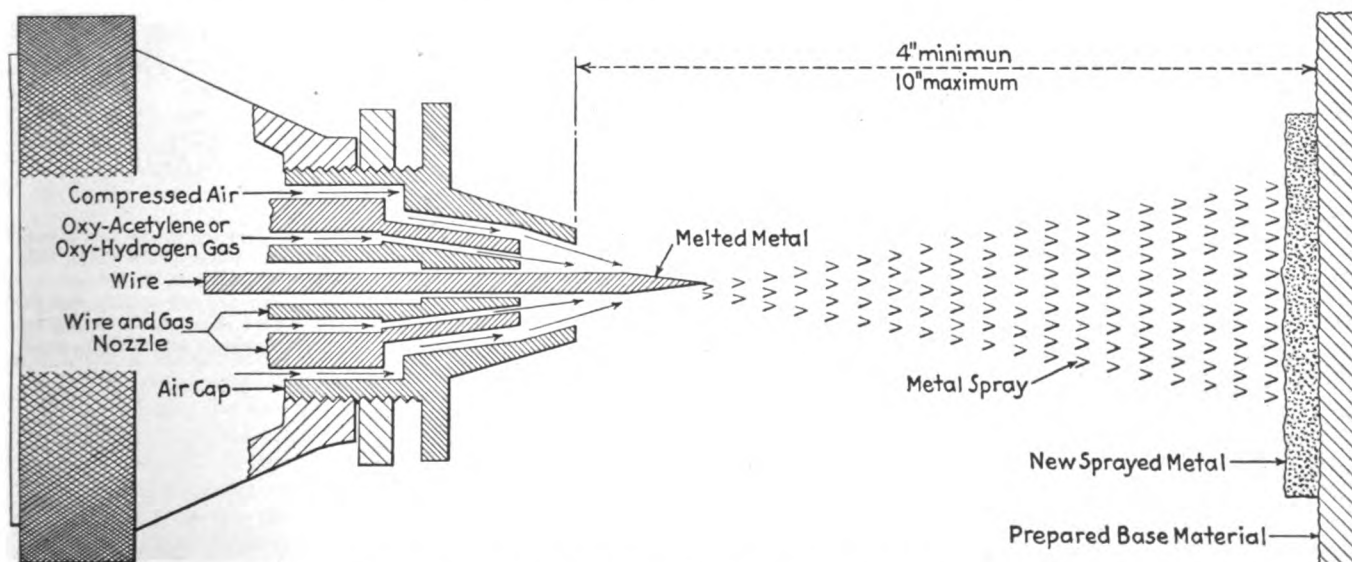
Cross-section of the wire nozzle and air gap of a metal-spray gun
